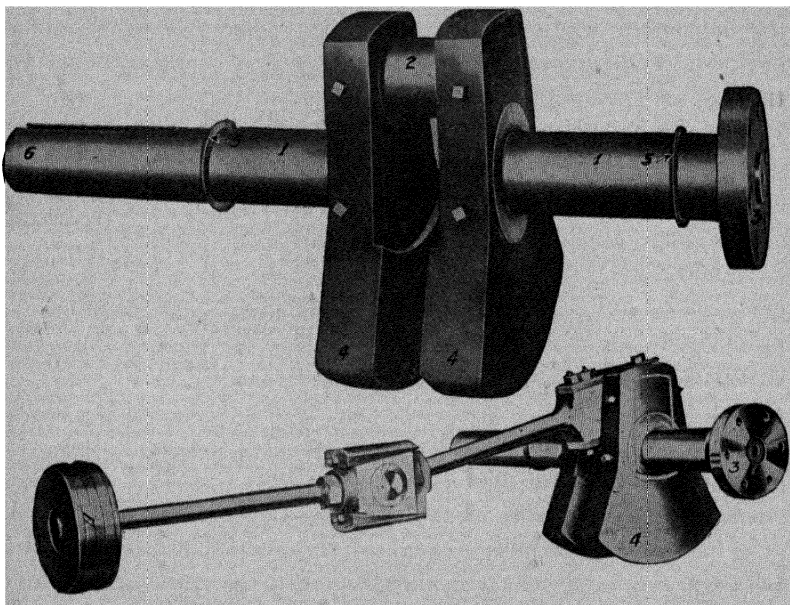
Connection of Piston, Crosshead, Connecting Rod, and Crank Shaft
